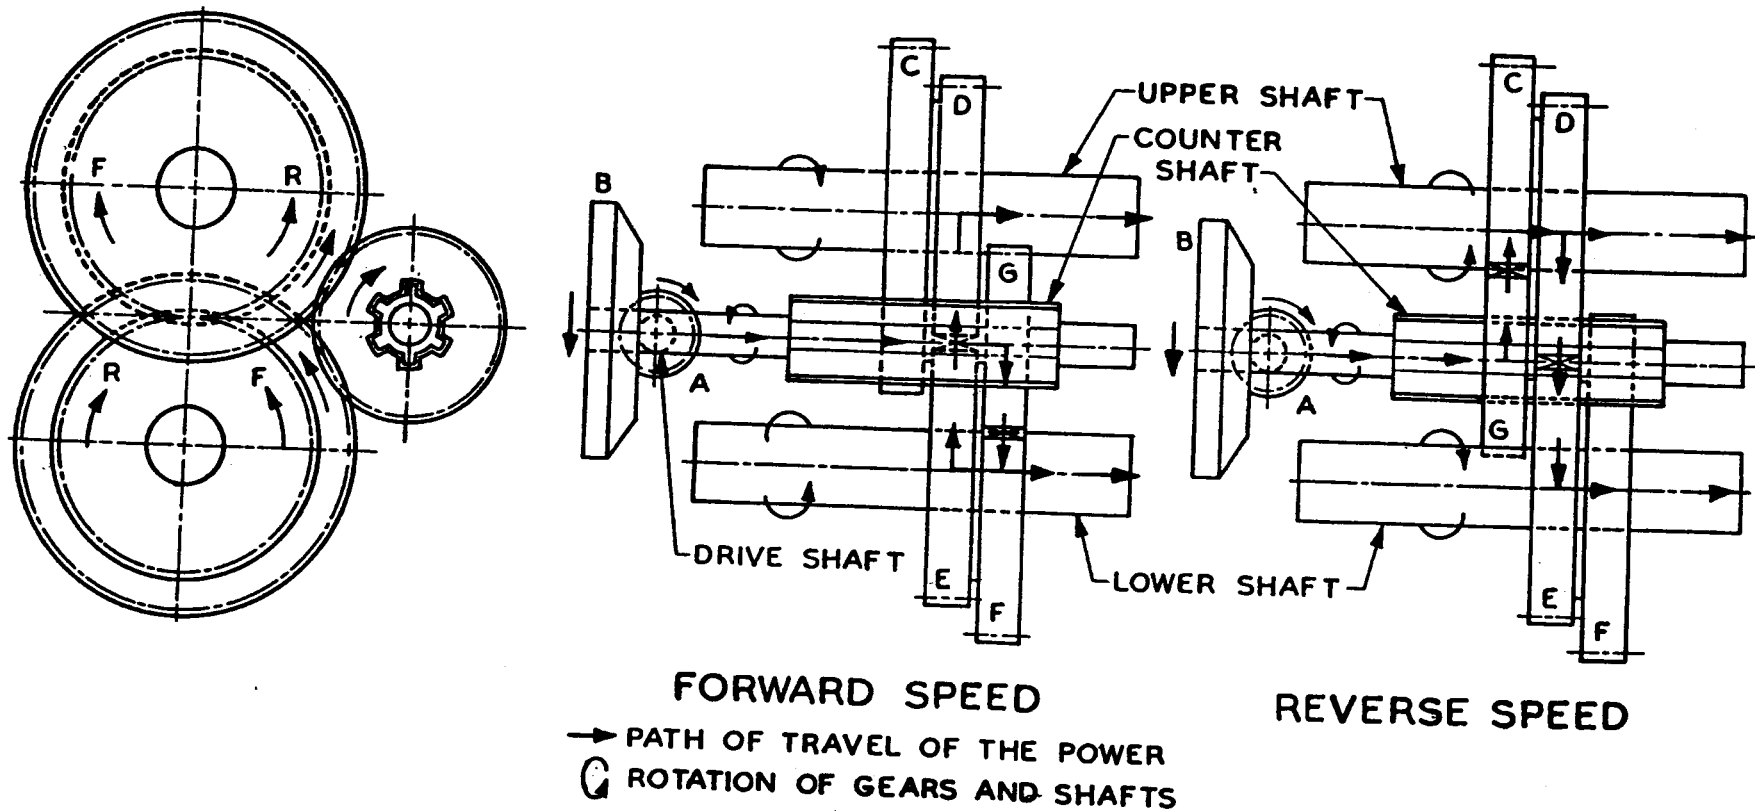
POWER TRANSMISSION THROUGH FEED-REVERSING SYSTEM FOR CONVEYOR-FED CHAFF CUTTERS
